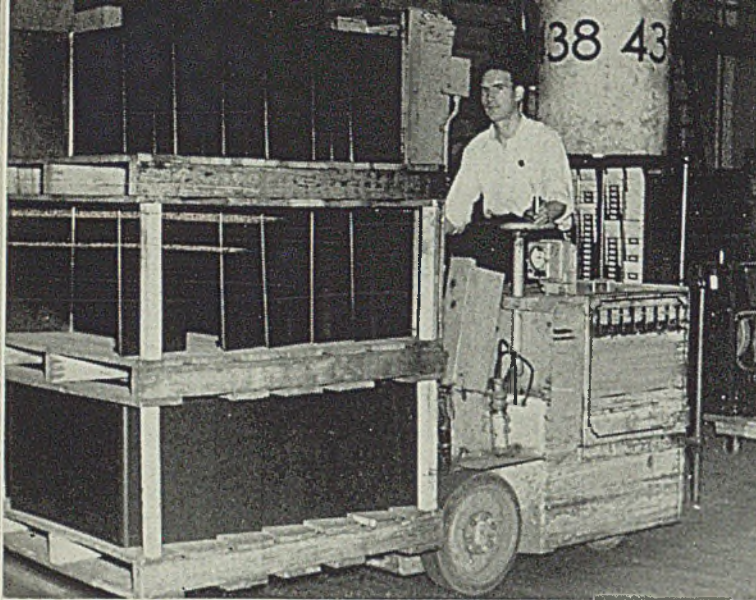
At left is shown how the plain flat pallet is adapted for multiple transport by using removable corner posts, for easy handling of formed parts. Fig. 2 at right shows welded steel racks made for handling sheet metal parts only. The shelves are removable and so can be adjusted to height desired
